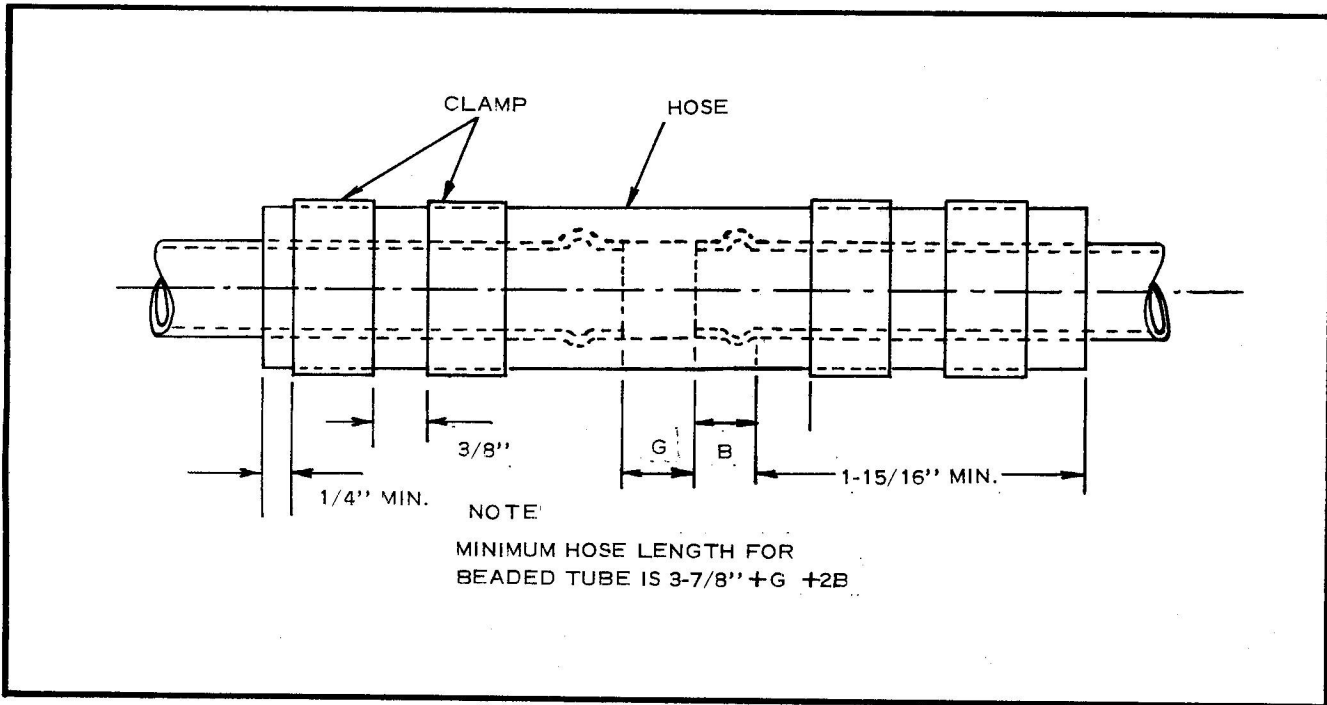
MIL-H-6000 Hose Joint With Double Clamps
